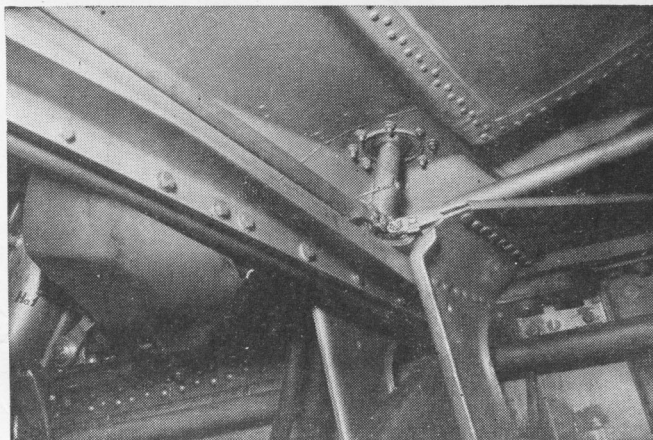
Bottom of the control stick, seen extending through a ball-and-socket joint in the bottom of the cockpit liner, with an aileron torque tube extending to the right and an elevator tube extending aft.
